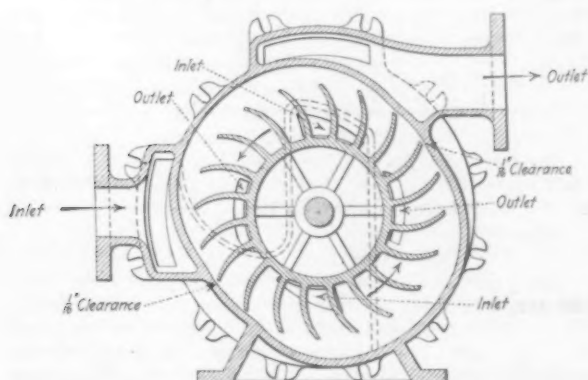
Details of the Design of the Nash Rotary Air Compressor and Vacuum Pump
